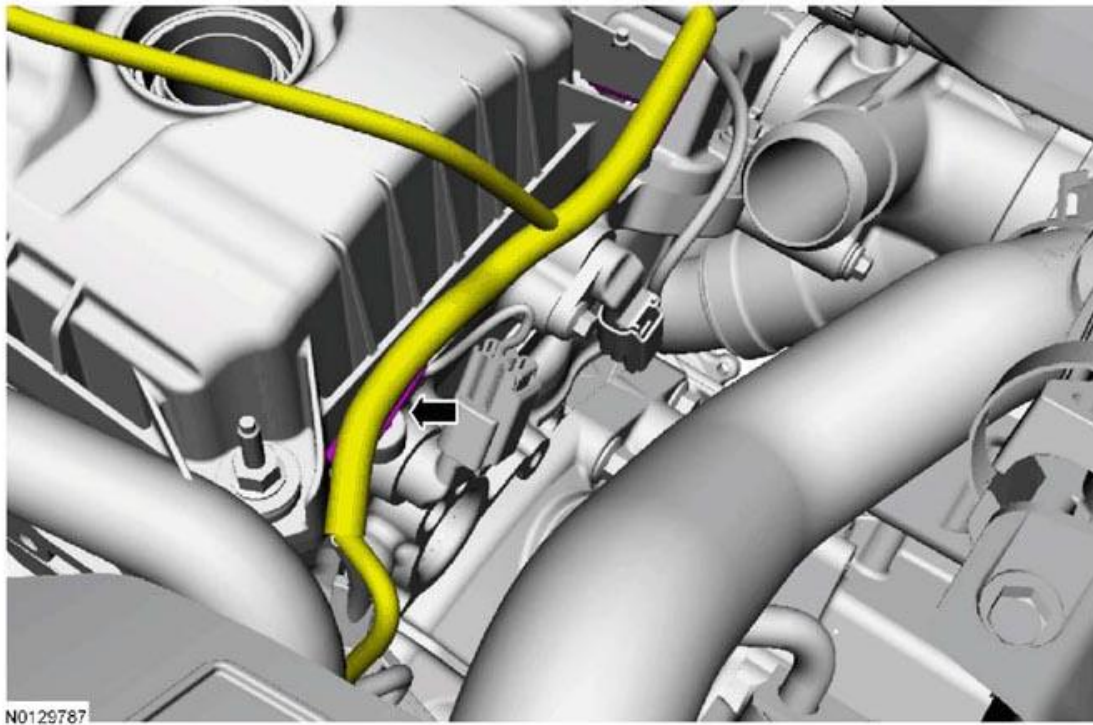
Locating Exhaust And Intake VCT Unit Bolts
